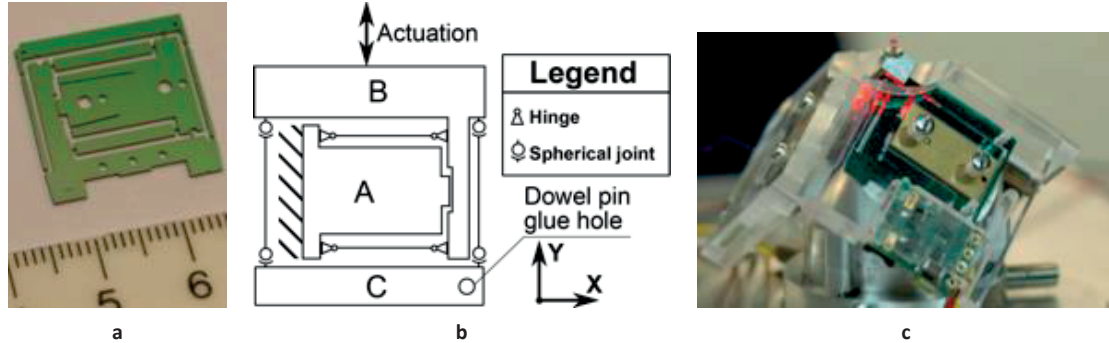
a) one of the parts used in the assembly of the old sugar-cube size delta robot. b) The kinematics of a single slab. Body A is fixed. Body B is connected by a parallelogram bar mechanism to body A and can translate along the Y axis, this translation is blocked by the actuator in our case an ultra-sonic piezo actuator from PI. Body C is blocked in the rotation around Z and the translation along Y. By coupling three slabs together orthogonally we can get a delta robot kinematics. c) Illustrates a sugar-cube size delta robot using ultrasonic piezo actuators.
